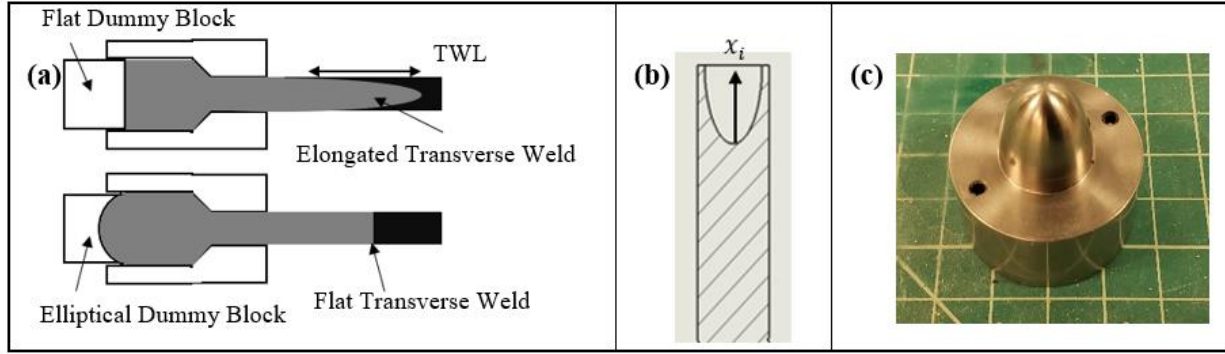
(a) Transverse weld geometry formed in conventional extrusion (top) and profiled dummy block and billet extrusion (bottom). (b) Section view of elliptical concave ram used in profiled dummy block and billet experiments. (c) The convex forming element used as part of the profiled billet mold.
